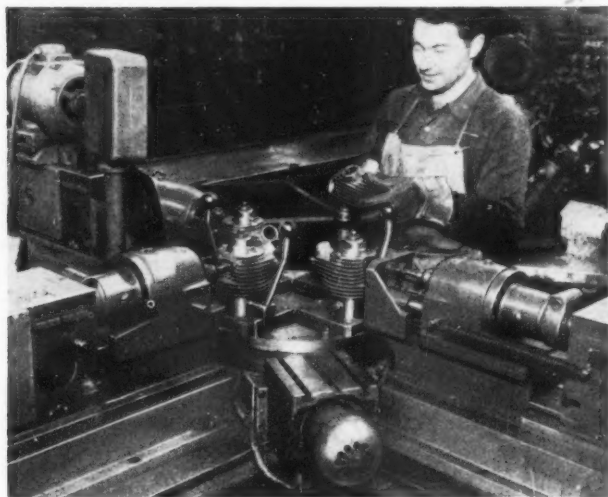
Another Oerlikon Machine is Employed for Drilling, Chamfering, and Tapping the Three Stud Holes in the Intake Port Face for the Attachment of the Carburetter, and is Tended by the Same Operator as the Machine in Fig. 11
